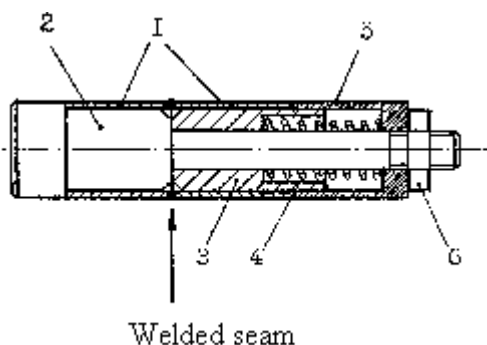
The scheme of device for manufacture of samples of welded joints of tubes from alloy Zr1%Nb:
